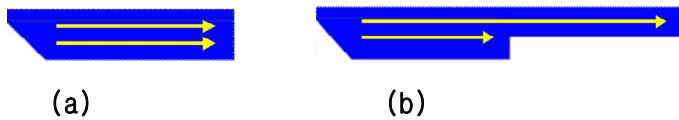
Before (a) and after (b) applying auxiliary runner geometry viewed from the side
